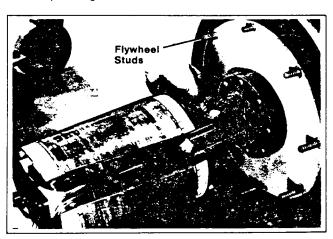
15RMY, 15RMOY & 17.5ROY Rotor Removal
